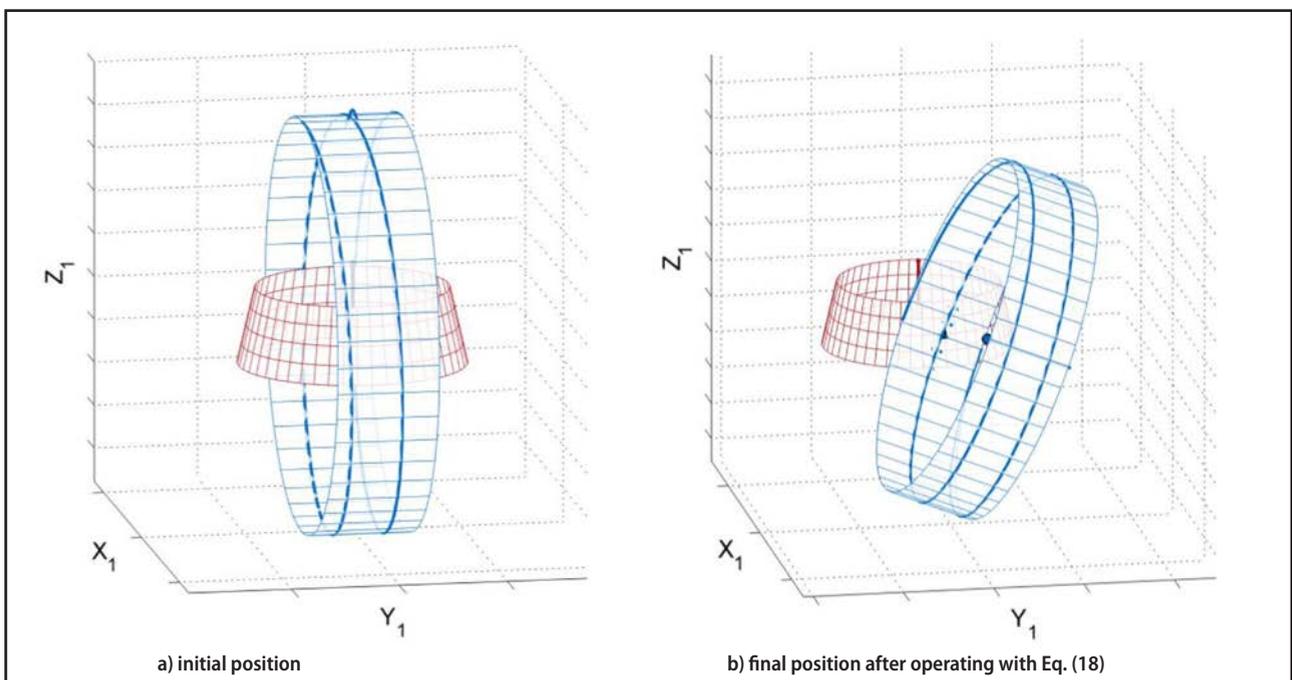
Calculating the relative position of cutting/grinding tool and workpiece.
